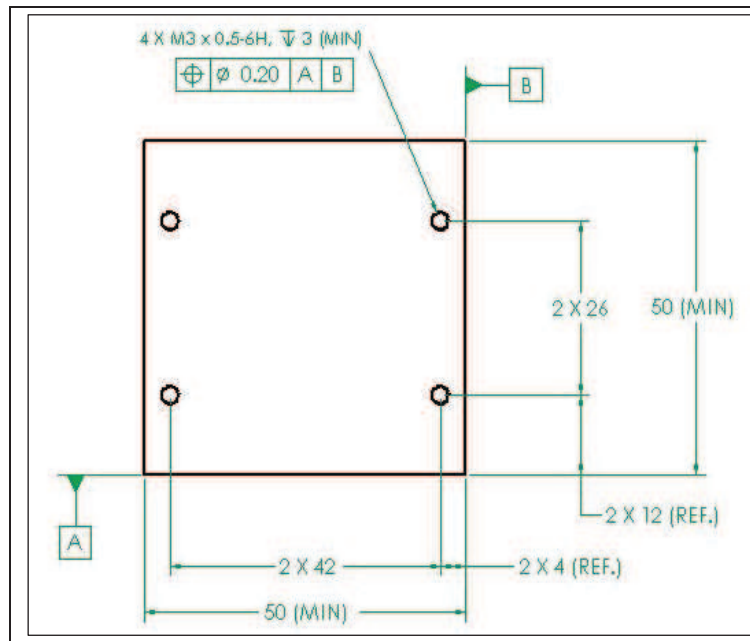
Tapped hole positions - 818P-xx-17W, 818P-xx-18xx and 818P-xx-19
